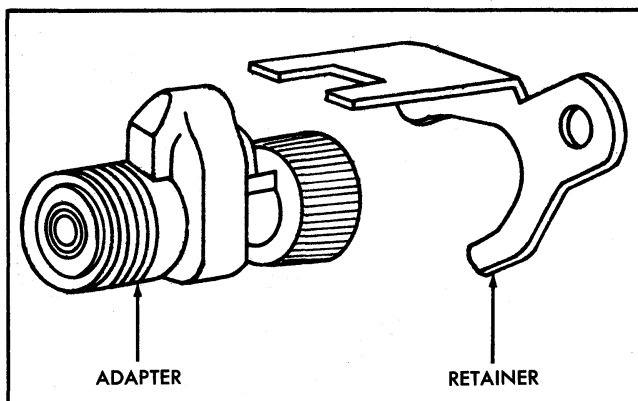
B-39 Speedometer Driven Gear Adapter and Retainer - Trailer Provision
